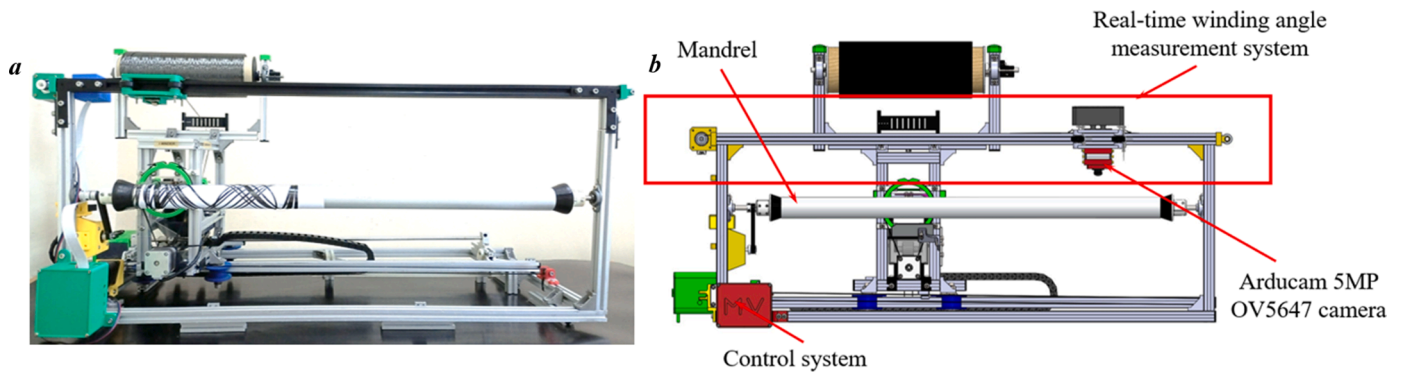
Laboratory scale 3-axis winding machine integrated with the real-time winding angle measurement system: (a) realized machine prototype; (b) 3D Solid-works machine design prototype.
